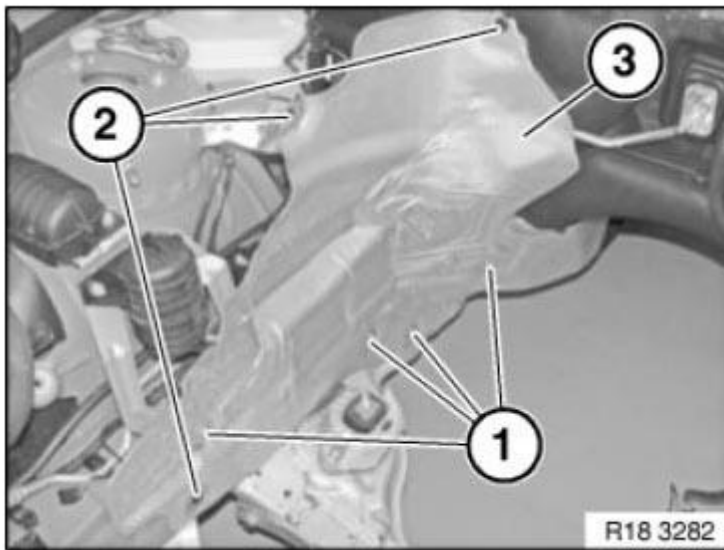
Identifying Heat Shield With Mounting Nuts And Screws
